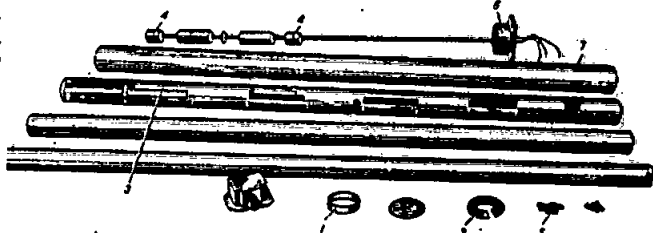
Fuel Gauge Transmitter, Disassembled
